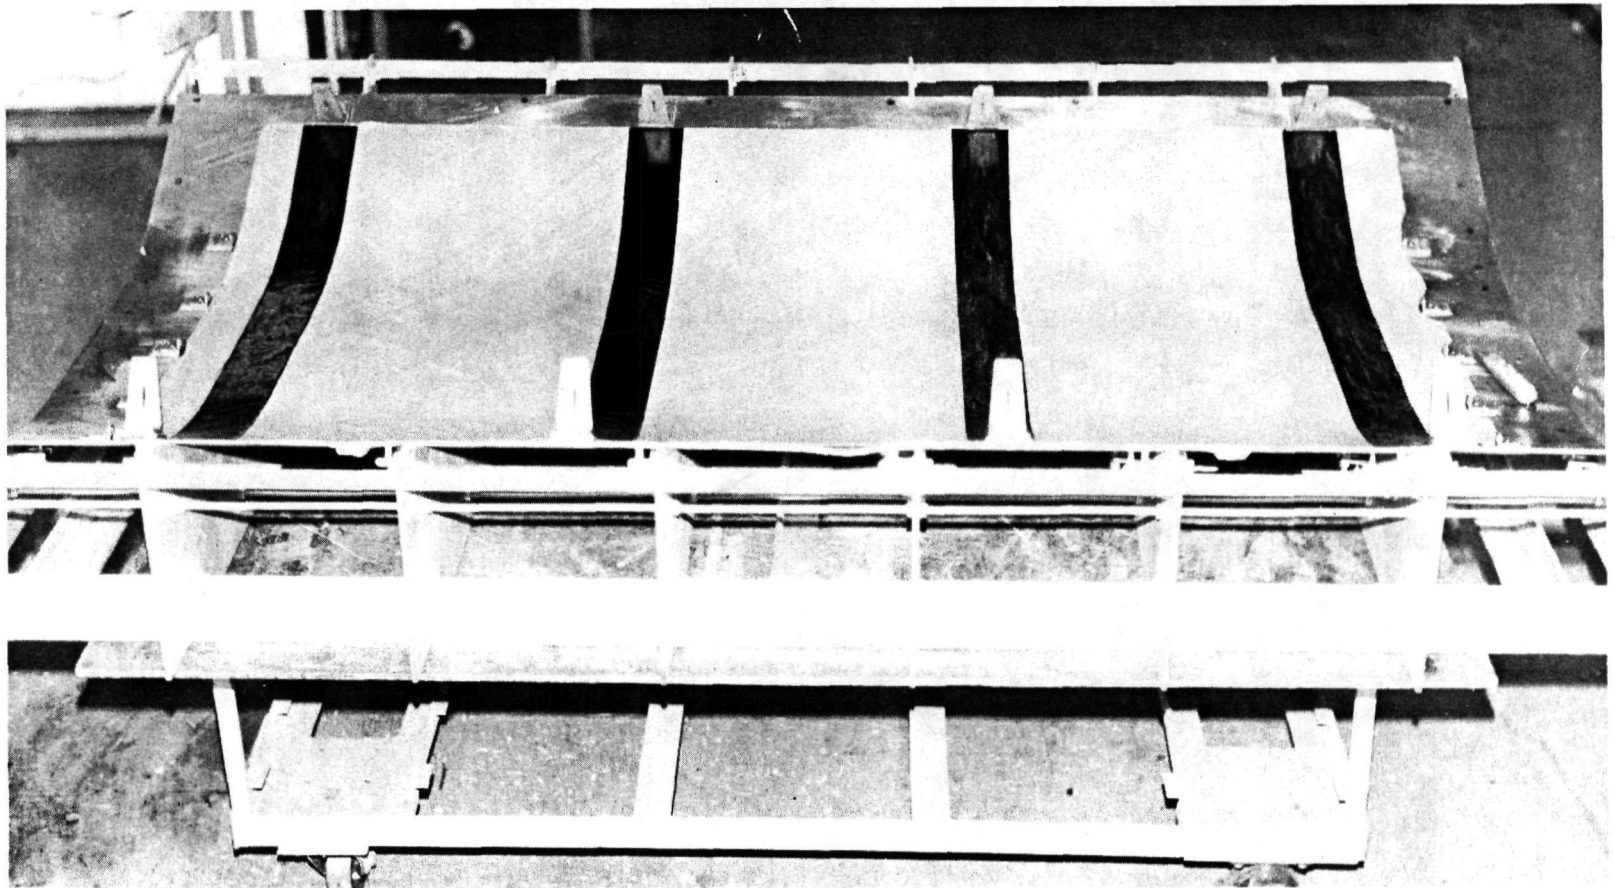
COMPLETED SKIN AND LOWER CAP LAYUP IN EWR 32381-T60 TOOL.
